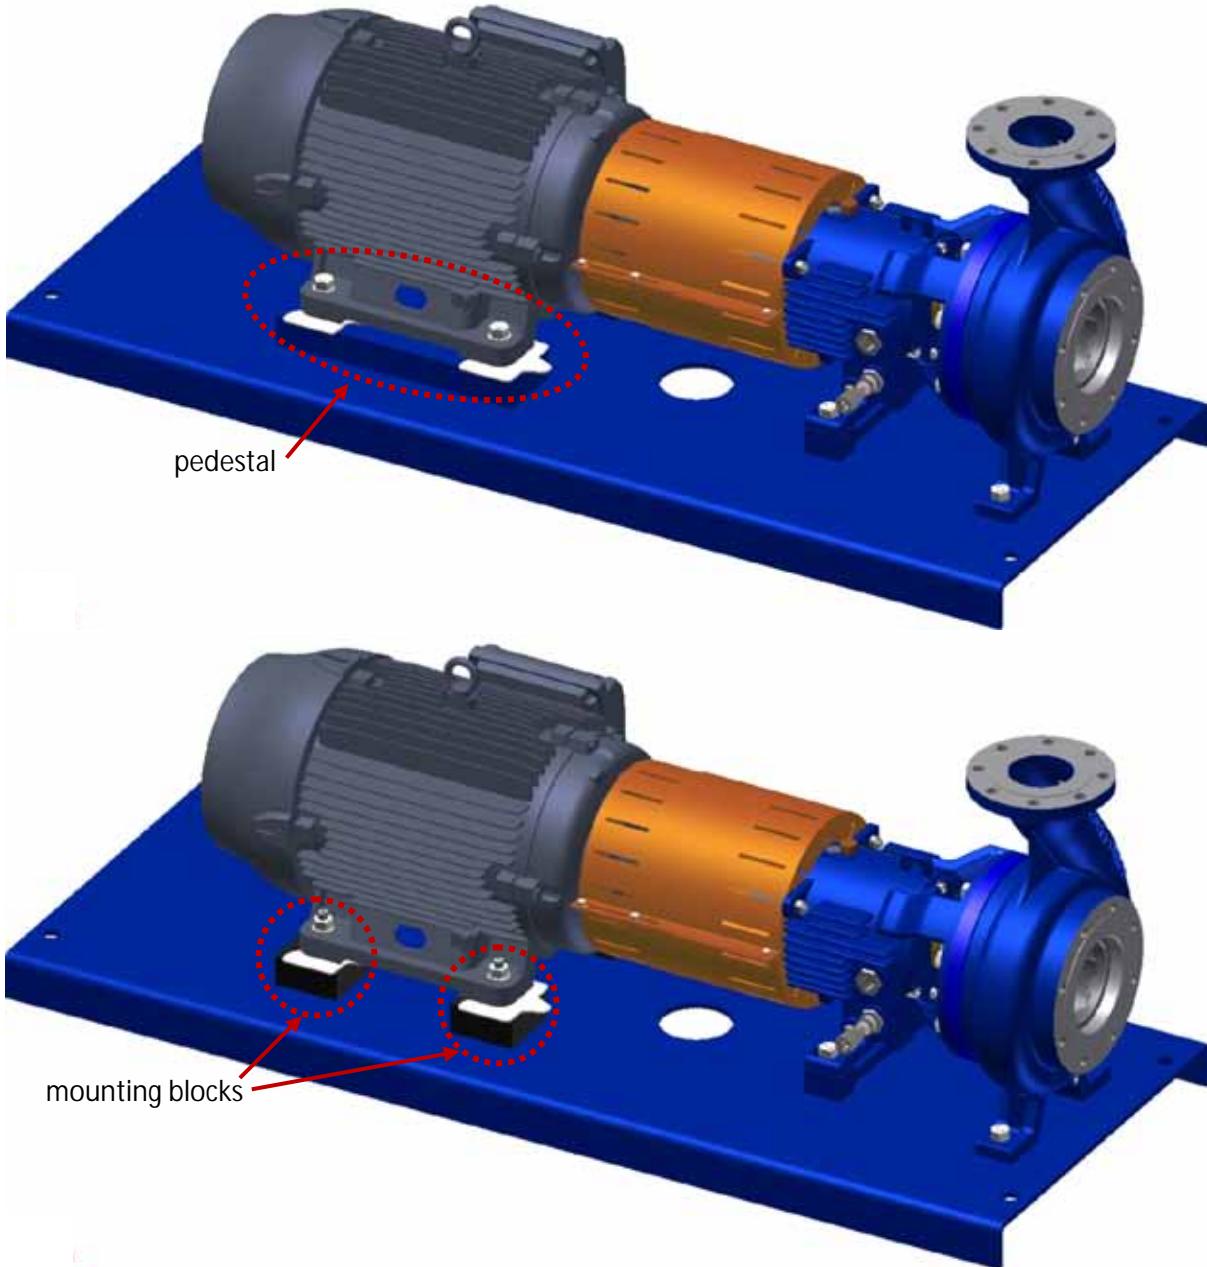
Above, baseplate with pedestals for driver. Below, baseplate with mounting blocks for driver.
